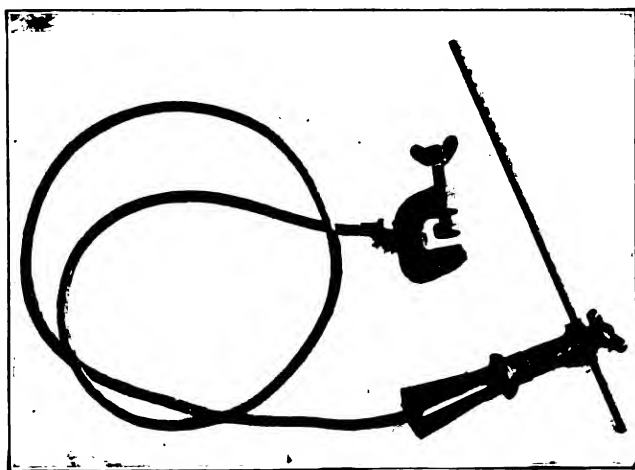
Arc-Welding Outfit for Burning Connections
